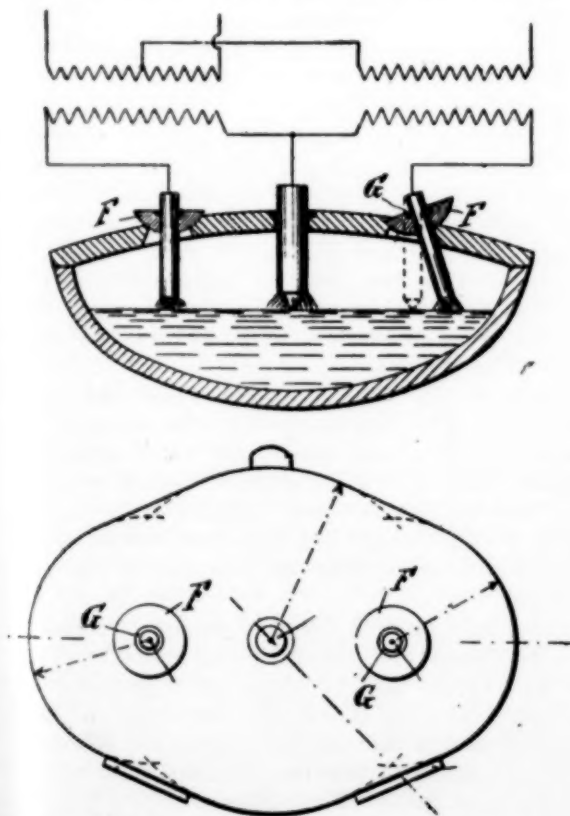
PLAN AND ELEVATION OF TWO-PHASE ARC FURNACE
